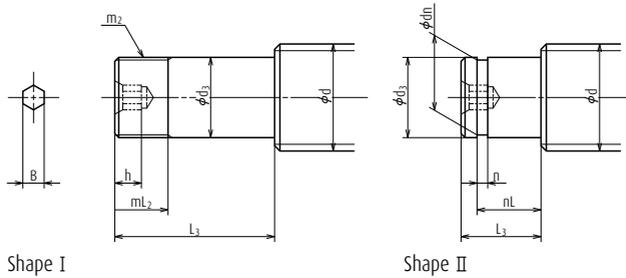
Standard shaft end configuration (opposite to the drive side)
